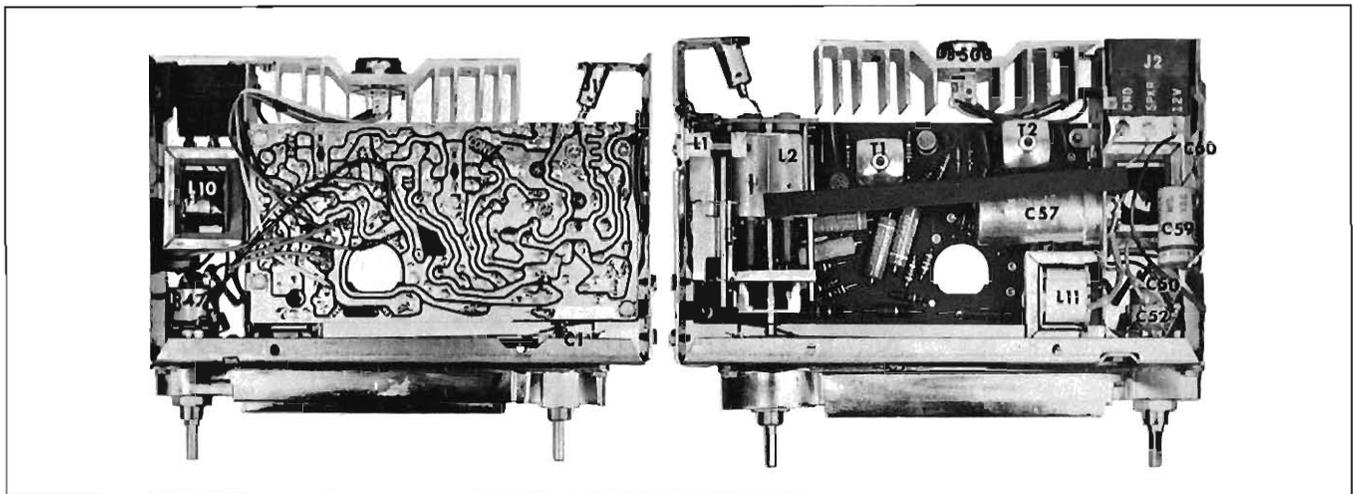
CHEVROLET TRUCK - PARTS LAYOUT - CIRCUIT BOARD VIEW - 986338 - RADIO
